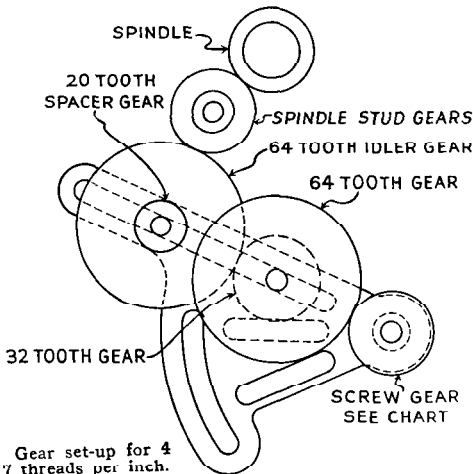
Gear set-up for 4 through 7 threads per inch.
